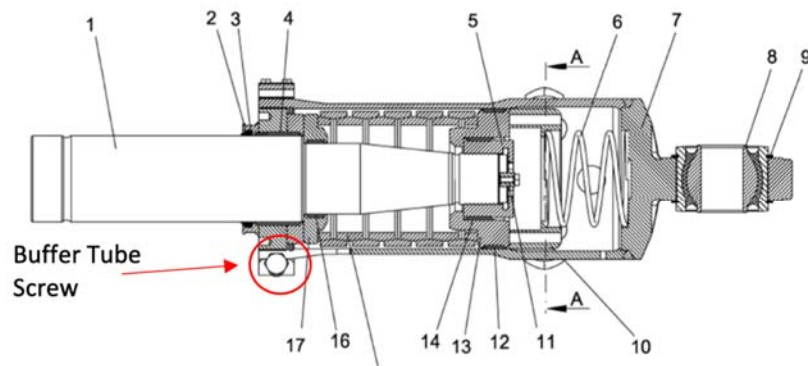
Left – Exploded view of Front-End Draft Gear.
